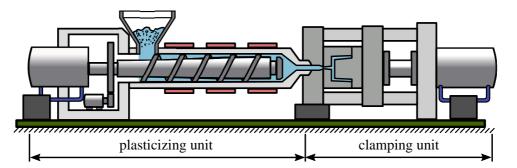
Illustration of an injection molding machine with plasticizing and clamping unit.
